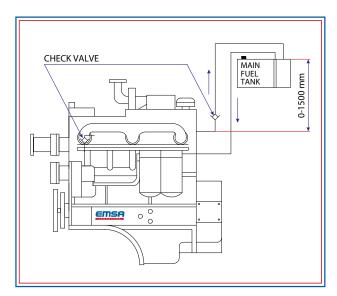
Fuel tank placed approximately above the fuel return and check valve connection
